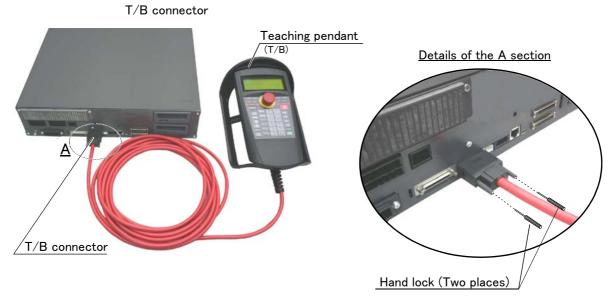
Installing and removing the T/B (CR751controller)
